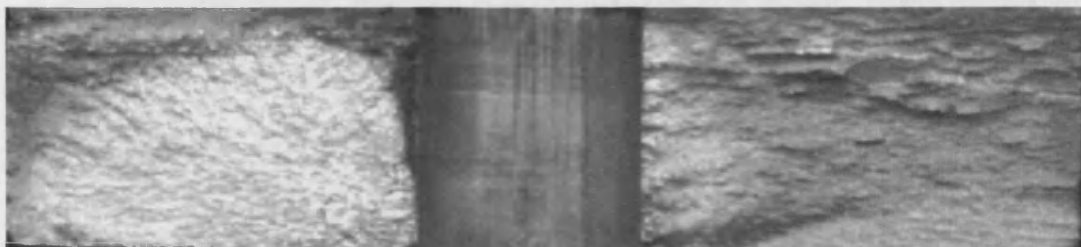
Fatigued specimen CC10 showing crack initiation away from hole edge
